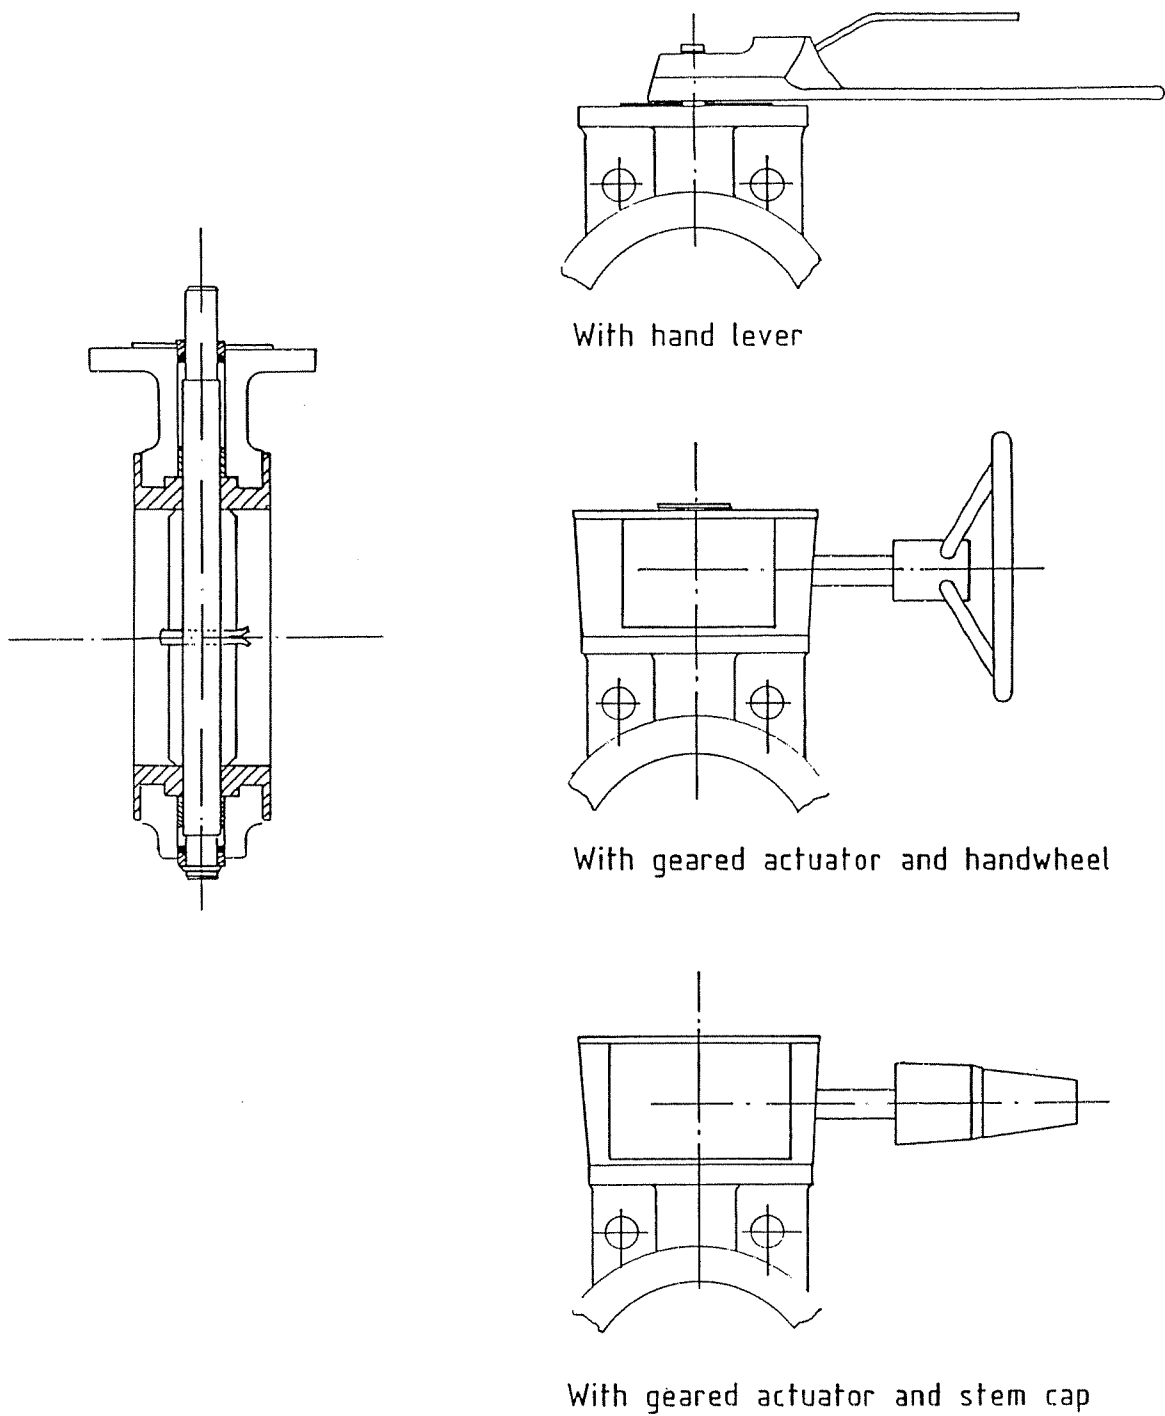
B BUTTERFLY VALVE (WAFER TYPE)
